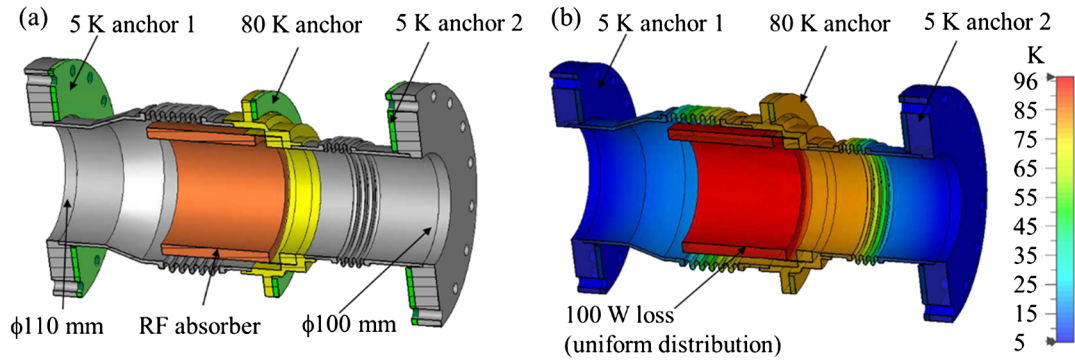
Design of the prototype HOM damper. (a) Diameters of the beam tubes are 110 mm on the left-hand side and 100 mm on the right-hand side, and the tubes are directly joined with the EUV nine-cell cavity. Gray parts indicate stainless steel, yellow parts indicate RRR300 copper, orange part indicates aluminum nitride, and green parts indicate thermal anchors. All parts were connected without thermal contact resistance. The actual structure of the thermal anchors was copper blocks brazed with copper cooling tubes and mounted on flanges with bolts. (b) Results of thermal simulation. The thermal radiation effect is not included. With an input of 100 W, the heat flows to 5-K anchor 1, 5-K anchor 2, and 80-K anchor are -0.175 , -0.28 , and -99.6 W, respectively. Without the input of 100 W, the heat flows to 5-K anchor 1, 5-K anchor 2, and 80-K anchor are -0.16 , -0.28 , and 0.41 W, respectively.
